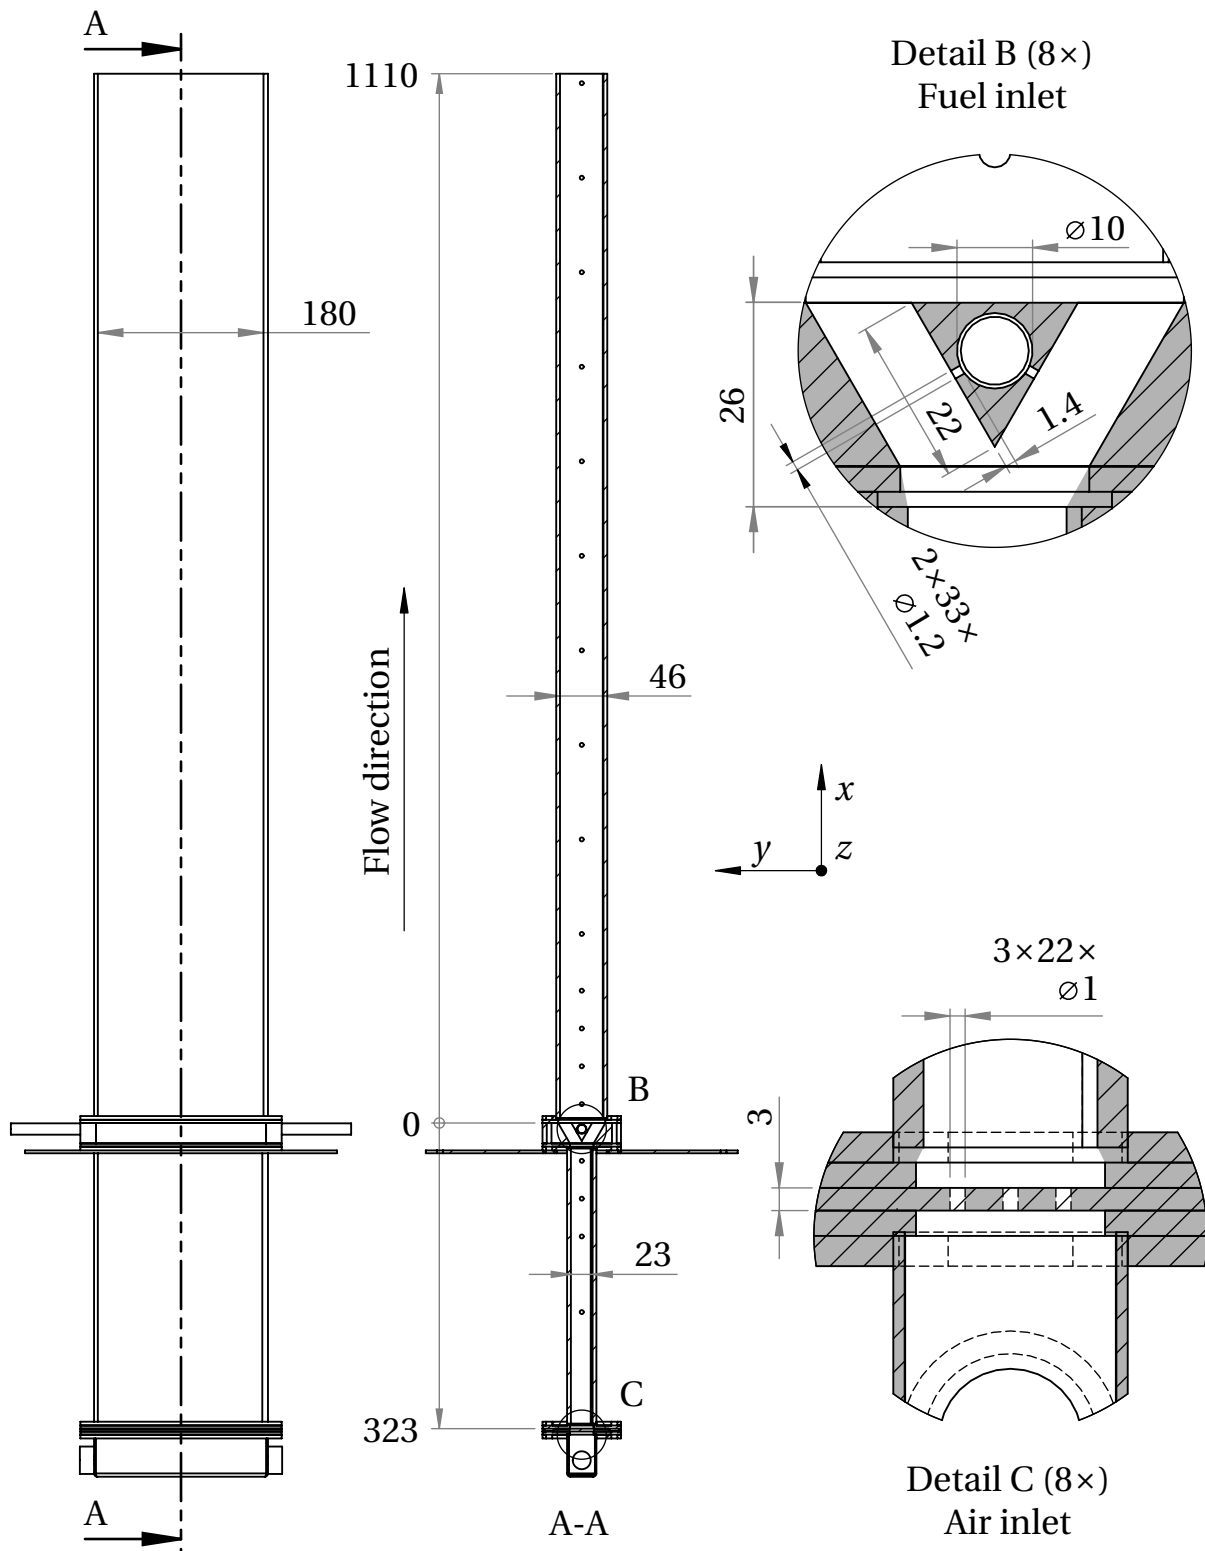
(Inner) dimensions of the Hummer test rig (in mm), with details showing fuel and air inlets.
